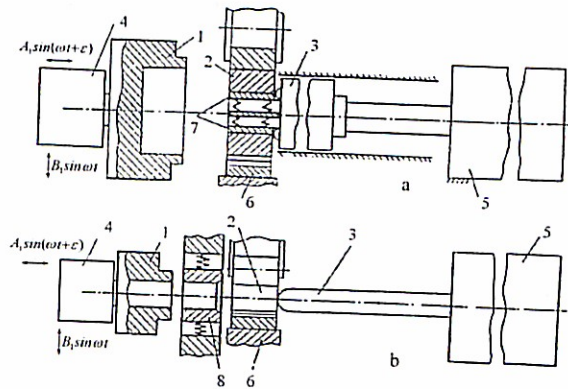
Vibrational devices for assembly of cylindrical parts: a – for assembly of a bushing with body; b – for assembly of a shaft with a bushing.
